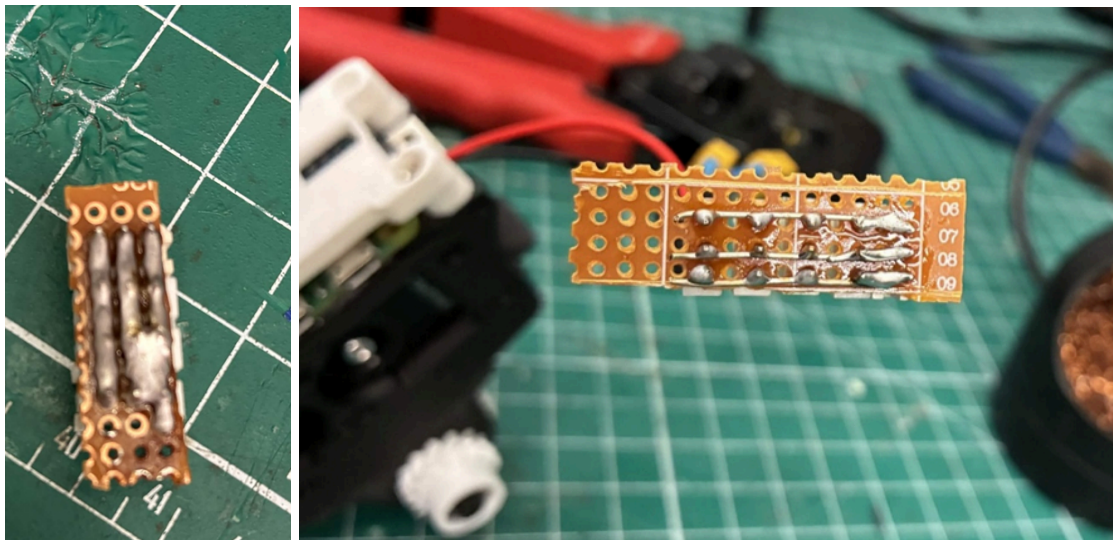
Left shows fused solder lines, right shows solution using solid core wire
